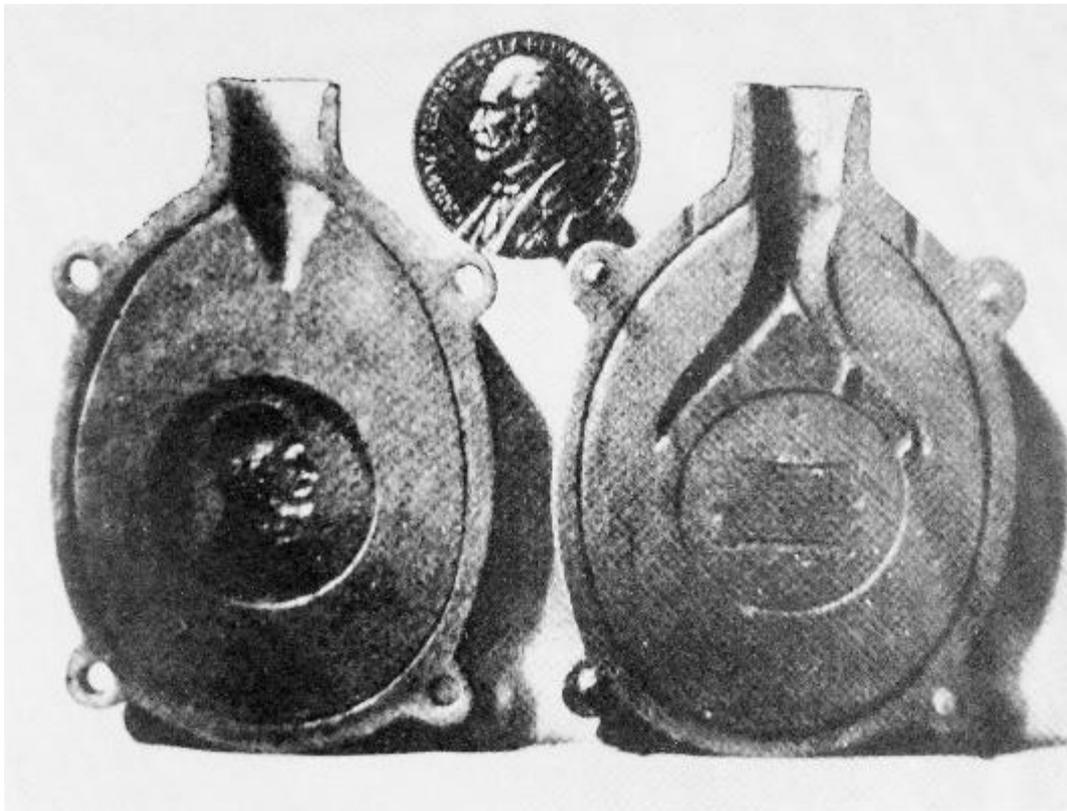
A finished sand mould inside a flask ready for casting. The medal used as pattern has been removed and the gating system has been carved in the surface of the sand. (from Richter, Ernst-Ludwig. *Altes Silber*, Keyser, 1983, fig. 201)
